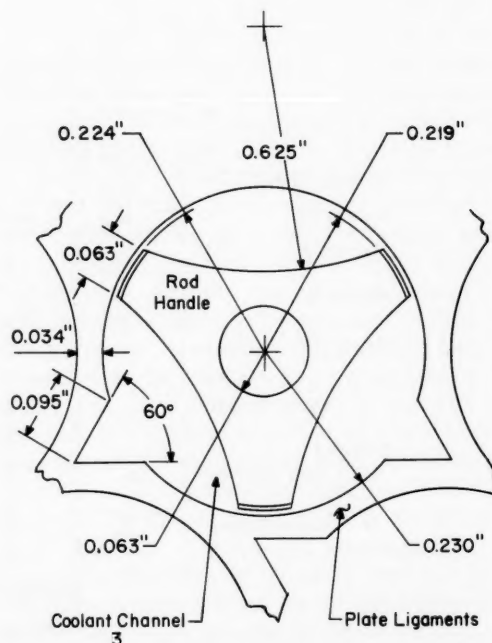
Horizontal cross section through lower shield plate and rod handle,⁶ EBR-I.
